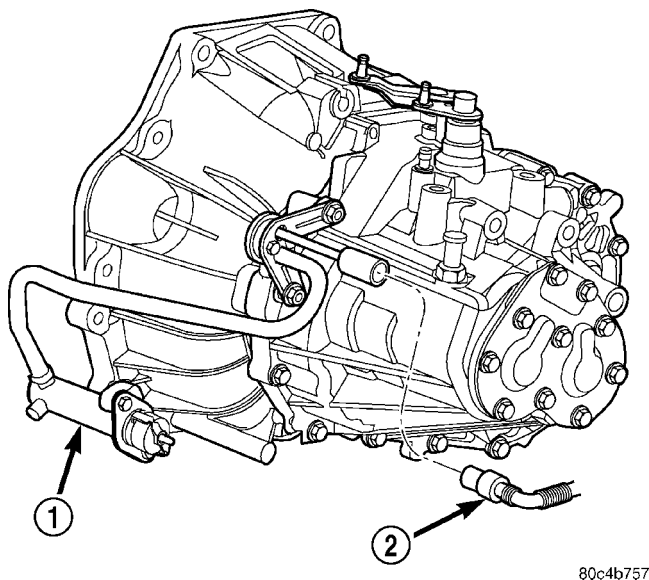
Clutch Hydraulic Line to Slave Cylinder
